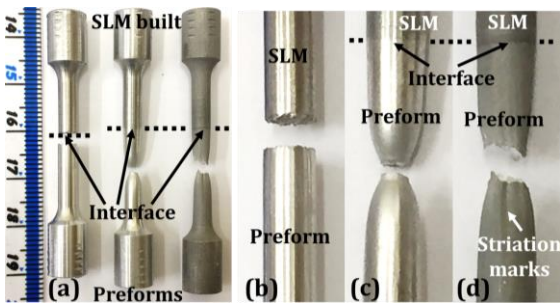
(a) Images of broken tensile test pieces (set-2), enlarged views at the fractured regions of (b) as-built, (c) annealed and (d) ST/A specimens.
